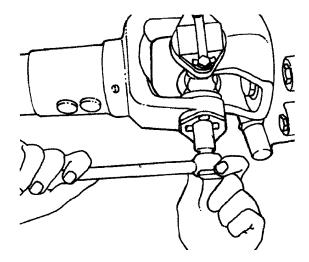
Remove Bolts From Bearing Assemblies Connected to Transmission or Axle End Yoke
